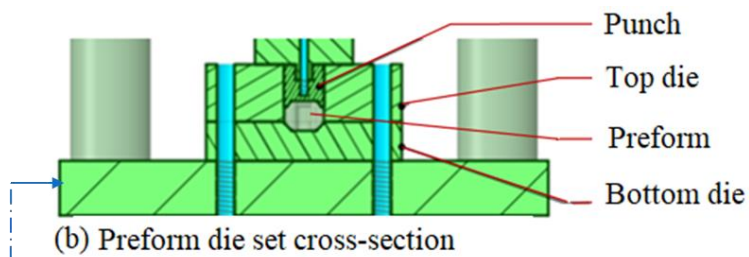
Upper and lower preform dies assembly for the cross joint forging, CAD
